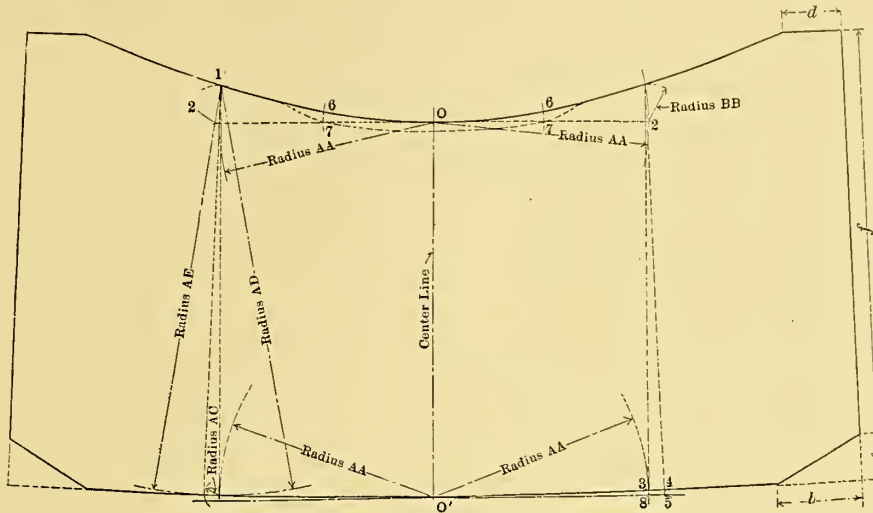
LAYOUT OF FIREBOX WRAPPER SHEET.
